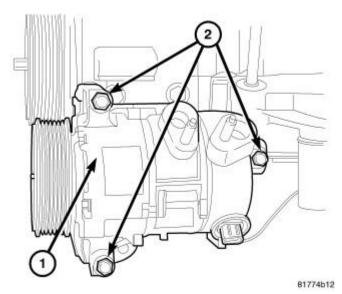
A/C Compressor & Fasteners Courtesy of CHRYSLER GROUP, LLC
